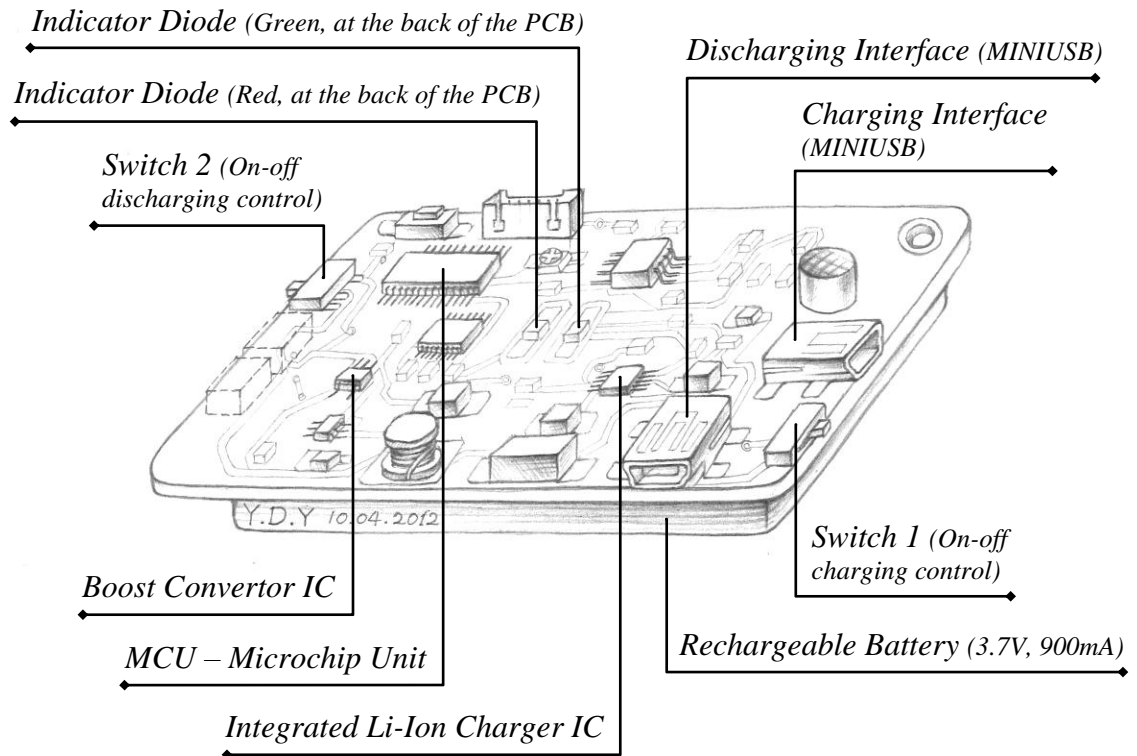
Sketch of the final PCB prototype with the main components for mobile phone charging
